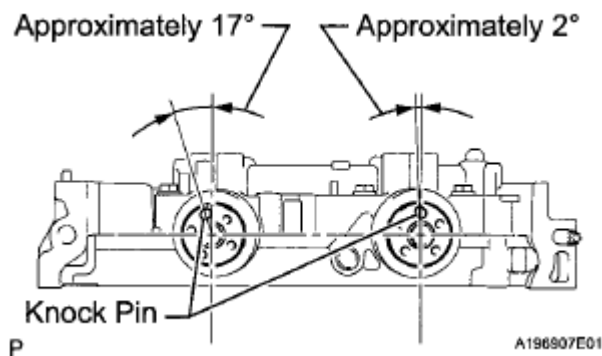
Identifying No. 1 And No. 2 Camshafts Knock Pin Positioning
